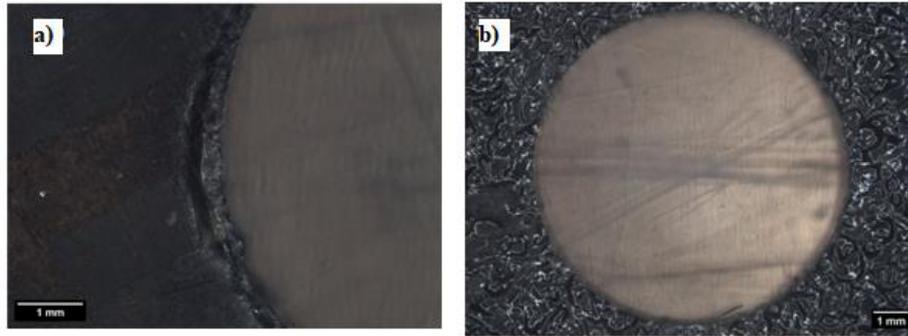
Hole surface using 90° angle drill and feed 0.06 mm/rev; b) Hole exit surface using 120° drill and $f = 0.04$ mm/rev.
